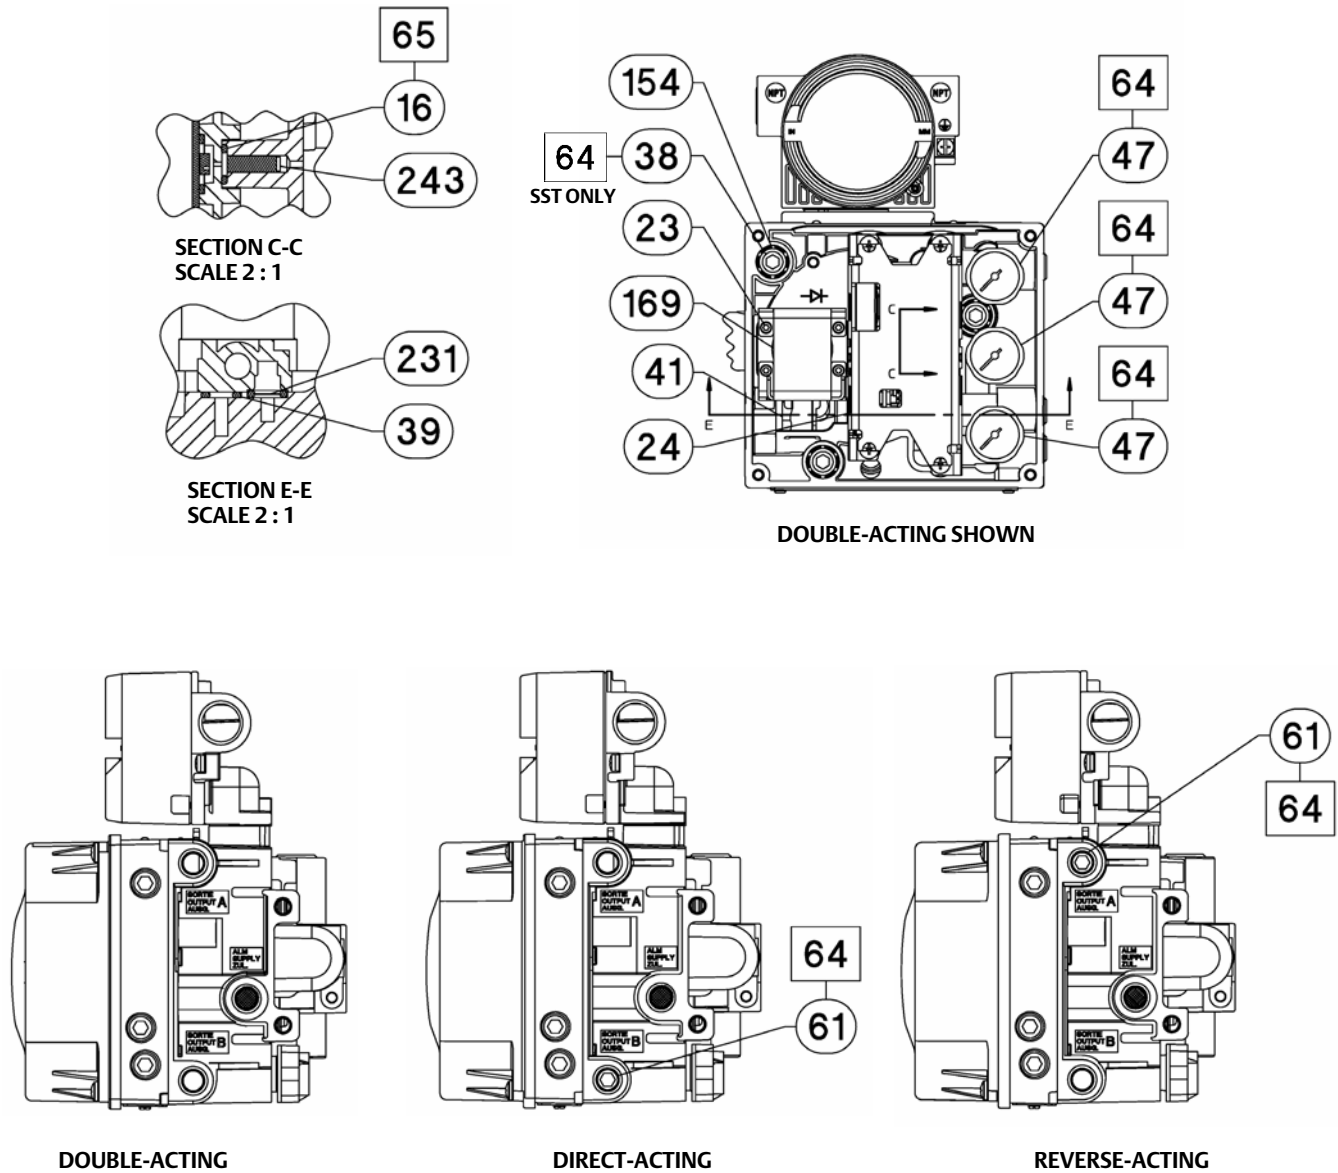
FIELDVUE DVC6205p Base Unit Housing Assembly
